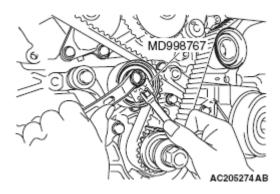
Pushing Tensioner Pulley Into Timing Belt Courtesy of MITSUBISHI MOTOR SALES OF AMERICA.
